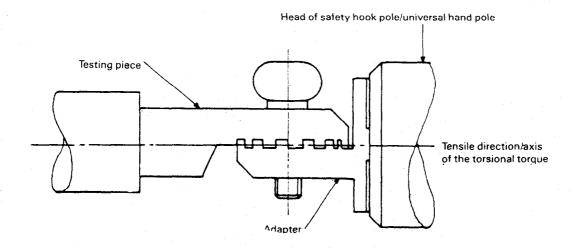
Torsion and tension of the universal adapter and the hook pole adapter (retractable hook stick adapter).
